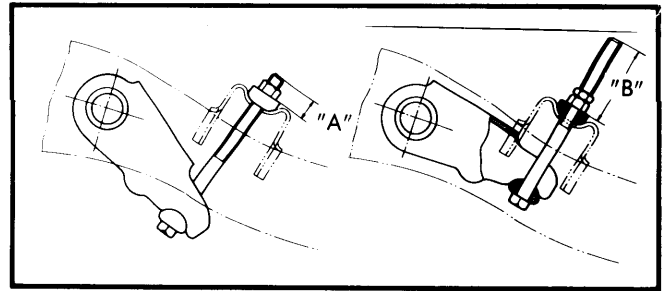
View Showing Measuring Points for Installation of Anchor Pin
